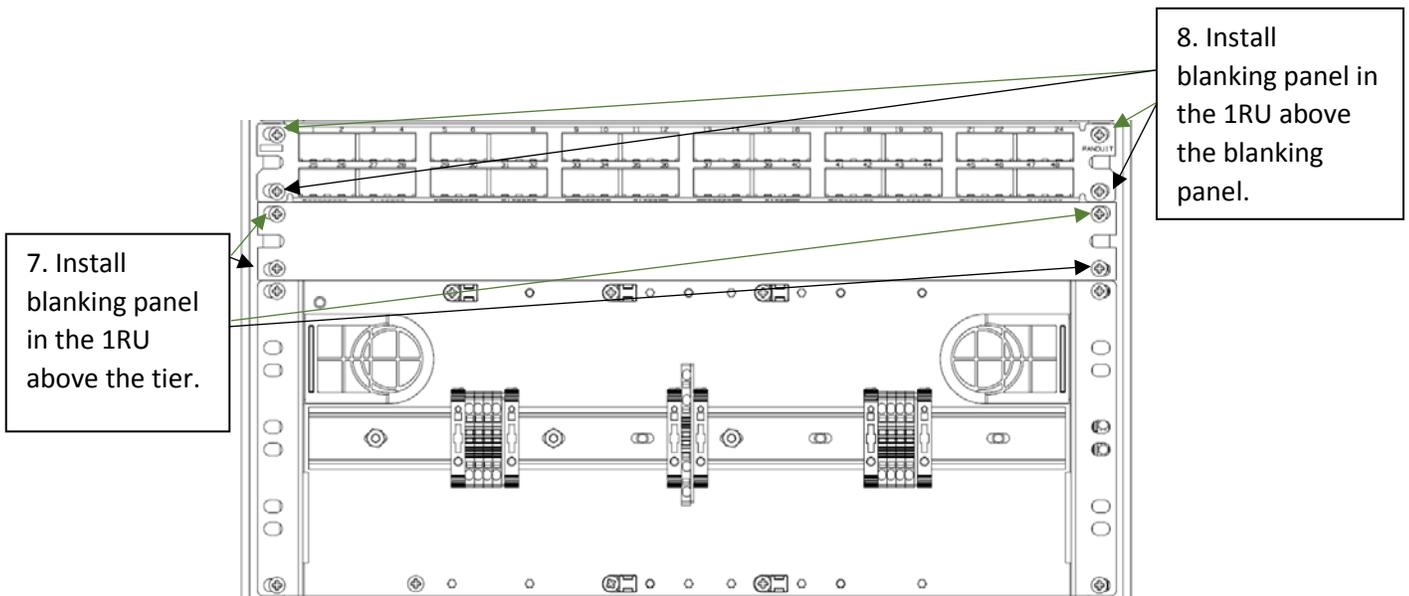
Front of Tier, Installing Patch Panel and Blanking Panel (Optional)
